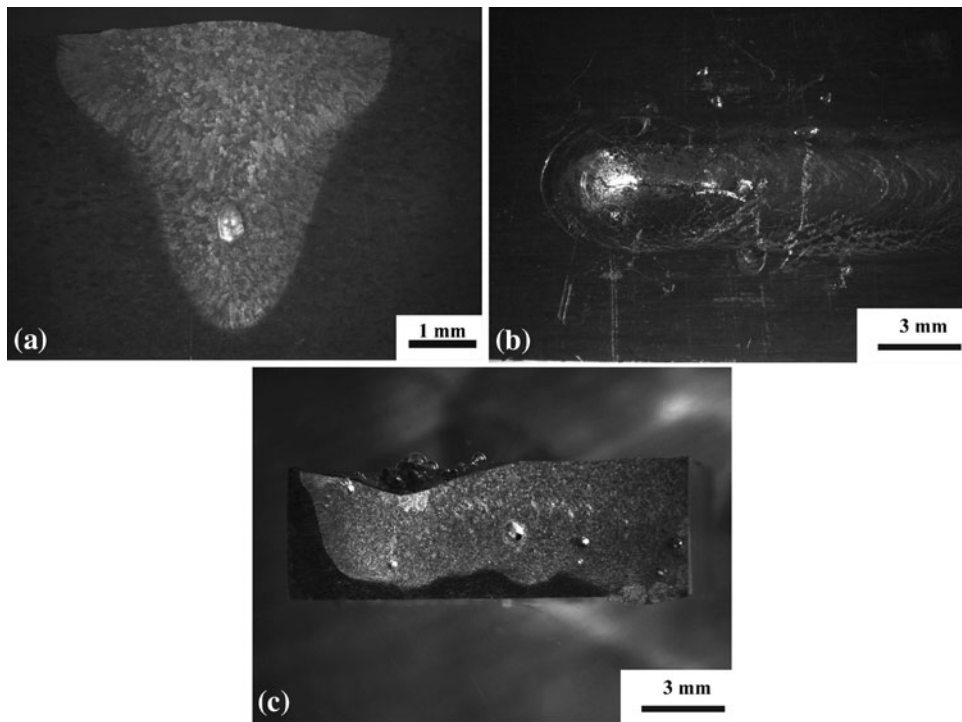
Laser beam weld of Al2139-T3 for energy deposition of 115 J/mm and beam focal point at top surface of workpiece. (a) Transverse cross section. (b) Top surface of workpiece. (c) Longitudinal cross section at symmetry plane. Beam power and welding speed are 3818 W and 2 m/min, respectively
